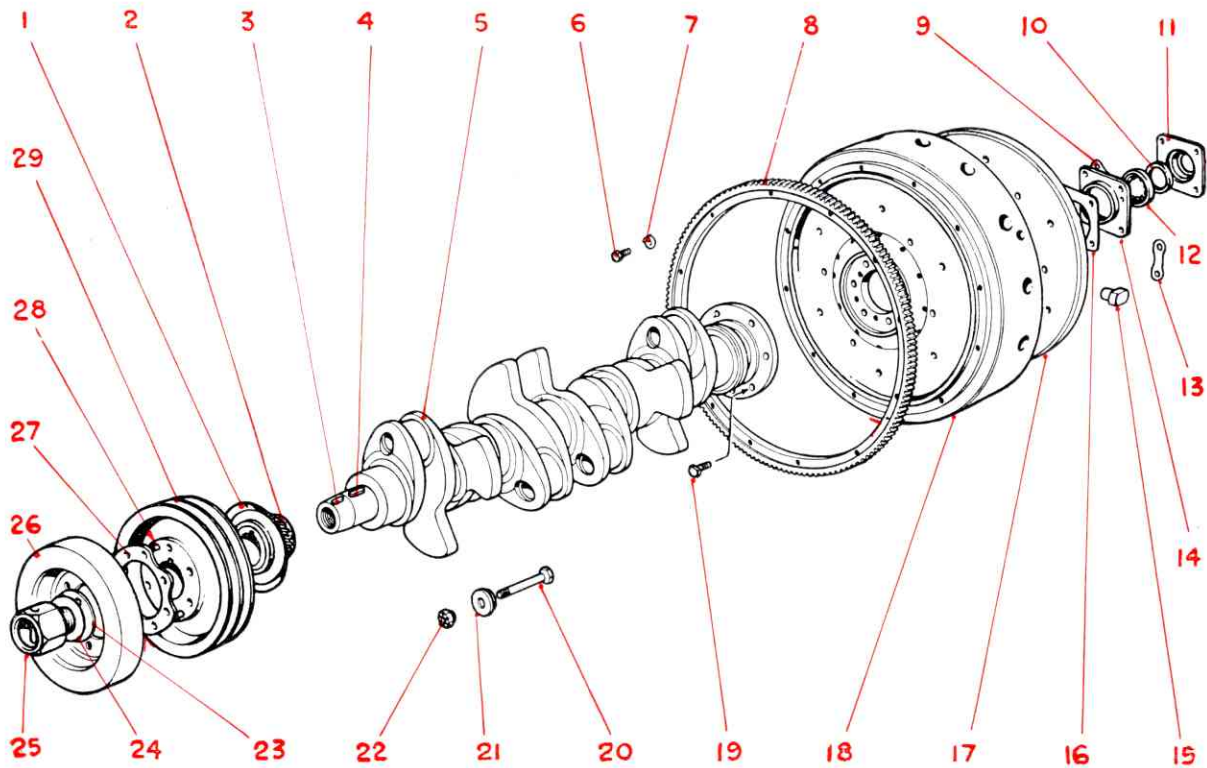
TYPICAL ILLUSTRATION OF CRANKSHAFT COMPONENTS
